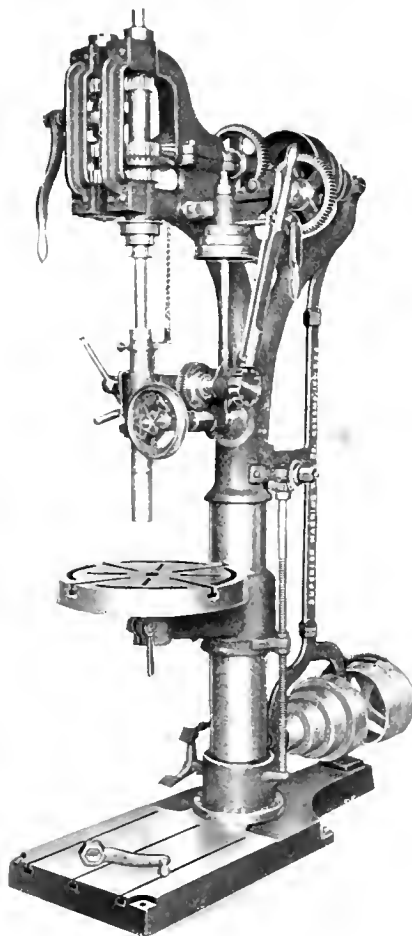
Superior Machine Co.'s Drill Press with Tapping Attachment
